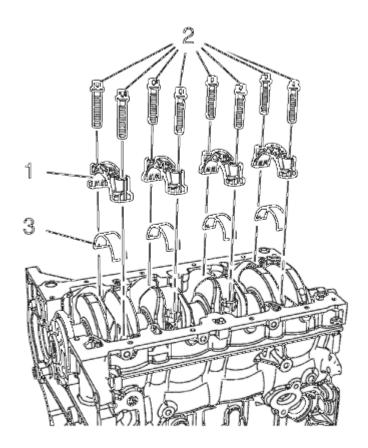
View Of Con-Rod Bearing Caps Courtesy of GENERAL MOTORS COMPANY
